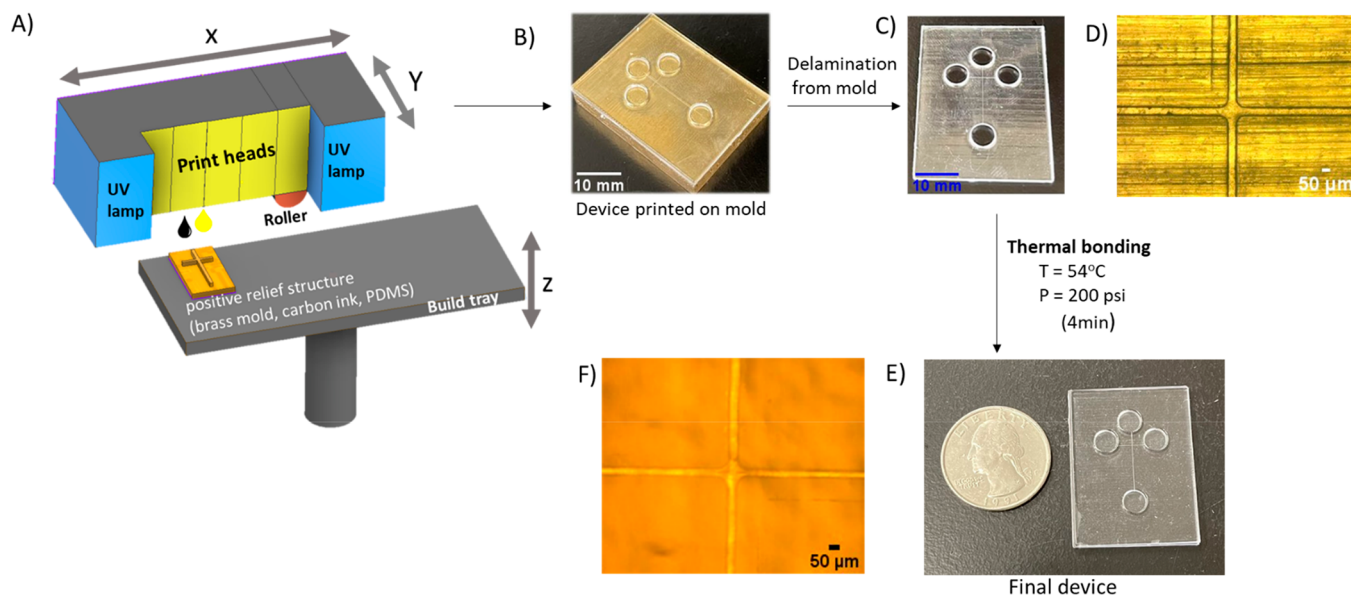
Fabrication of cross-channel structure with Polyjet 3D printer: (A) printing CAD design model on positive relief structure; (B) device printed on a brass mold; (C) device after delamination from mold; (D) bright-field micrograph of channel intersection before bonding; (E) bright-field micrograph of channel intersection after bonding; and (F) photograph of the final device (after bonding), with respect to a US quarter.
